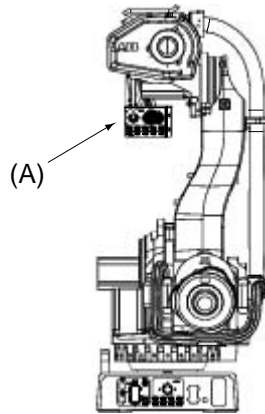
“Silver line” DressPack Lower arm rear side view SpotWelding (option 778-2 and option 798-1).
